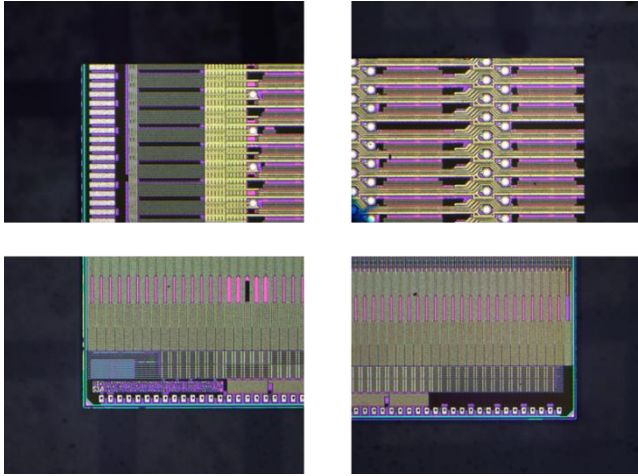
Edge inspection of an RD53A chip. The edges look good and are accepted for assembly.
